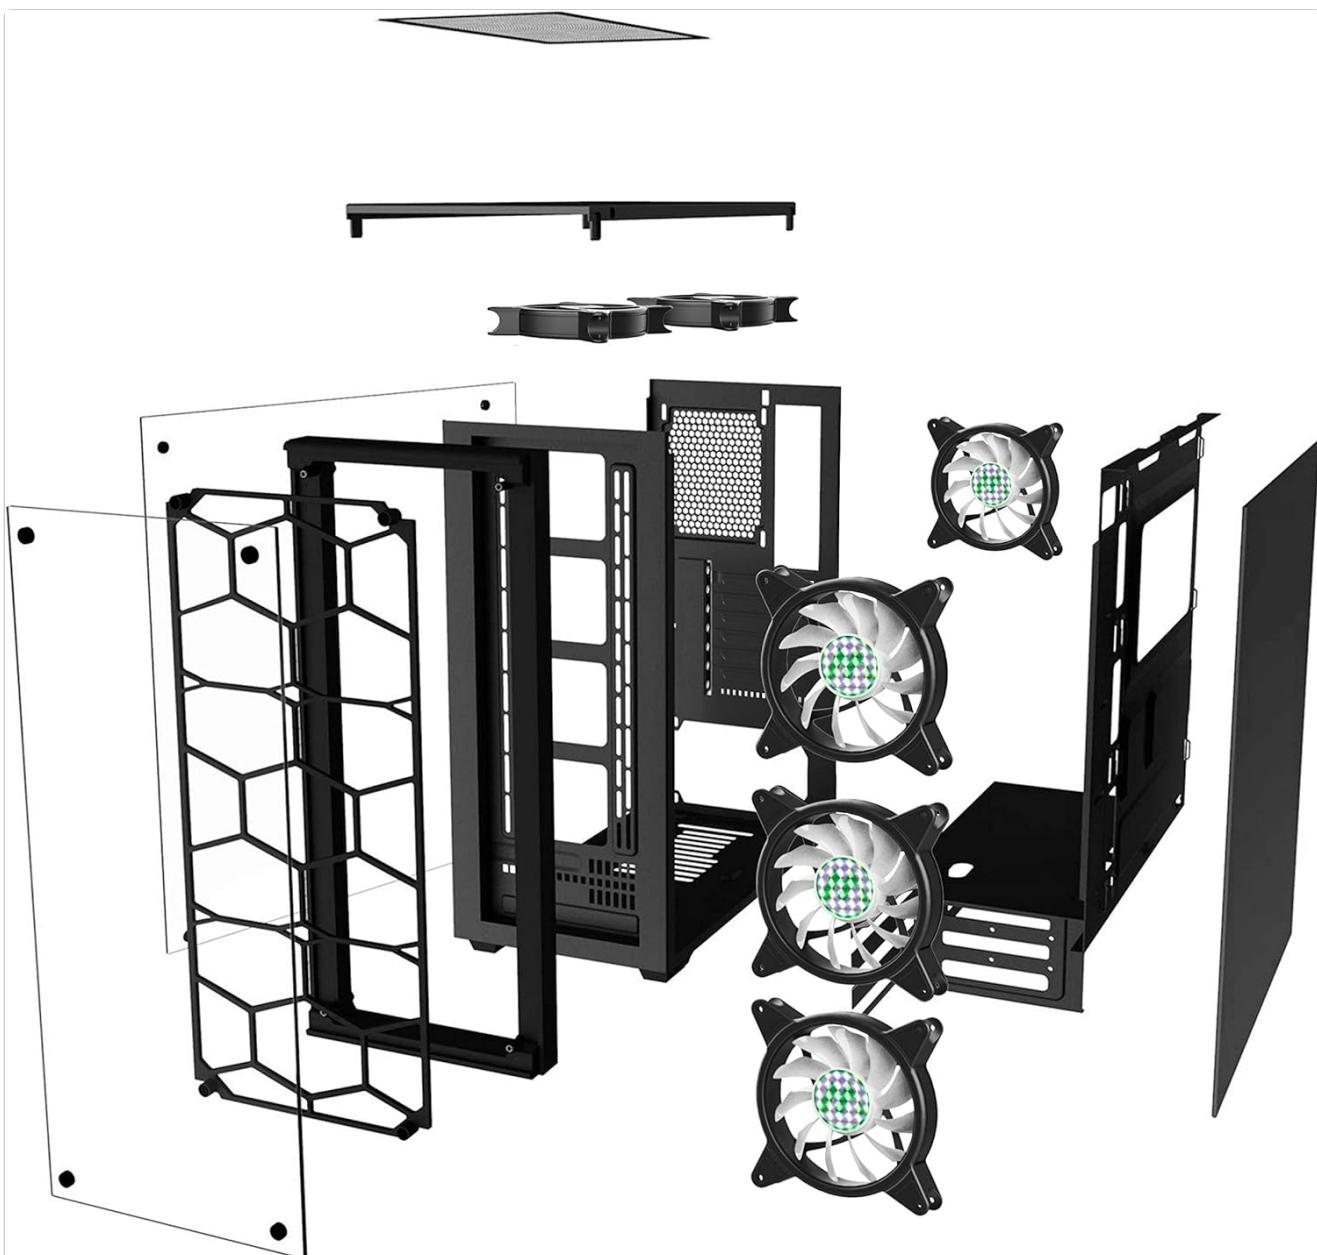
Exploded view illustrating the case components, including tempered glass panels, frame, and fans.
